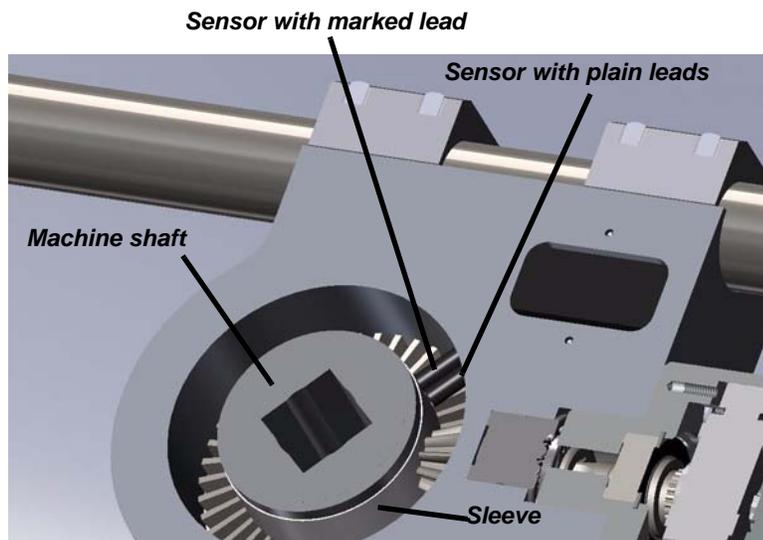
Cross section of assembly showing sensors against magnet retaining sleeve.
